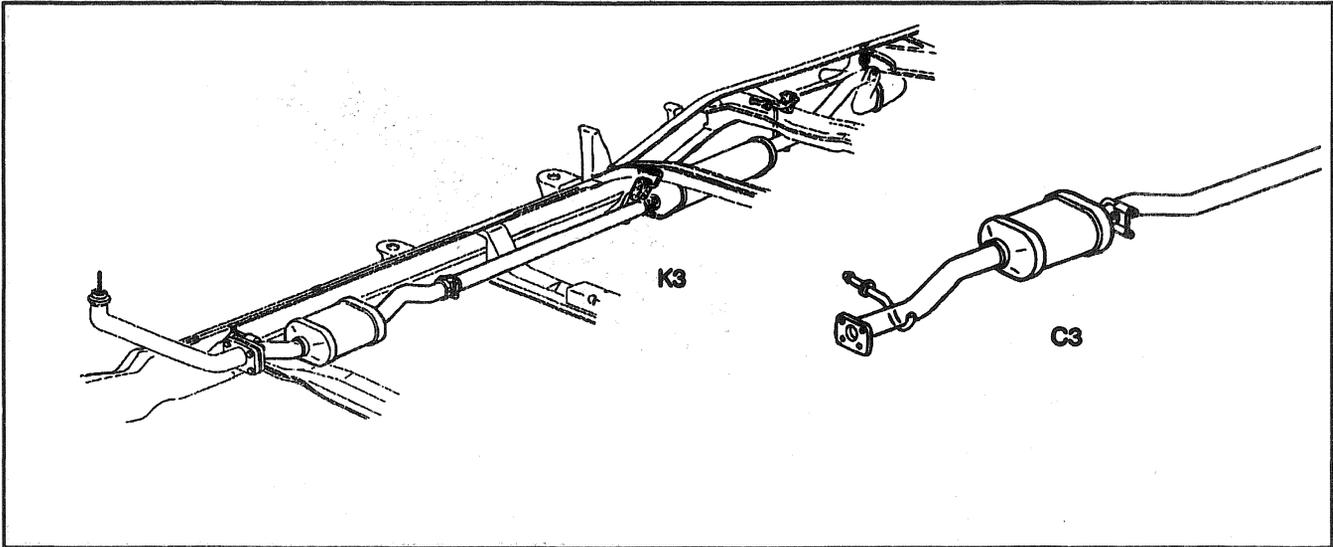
Exhaust System - C/K 3 Crew Cab w/6.5L Diesel Engine
